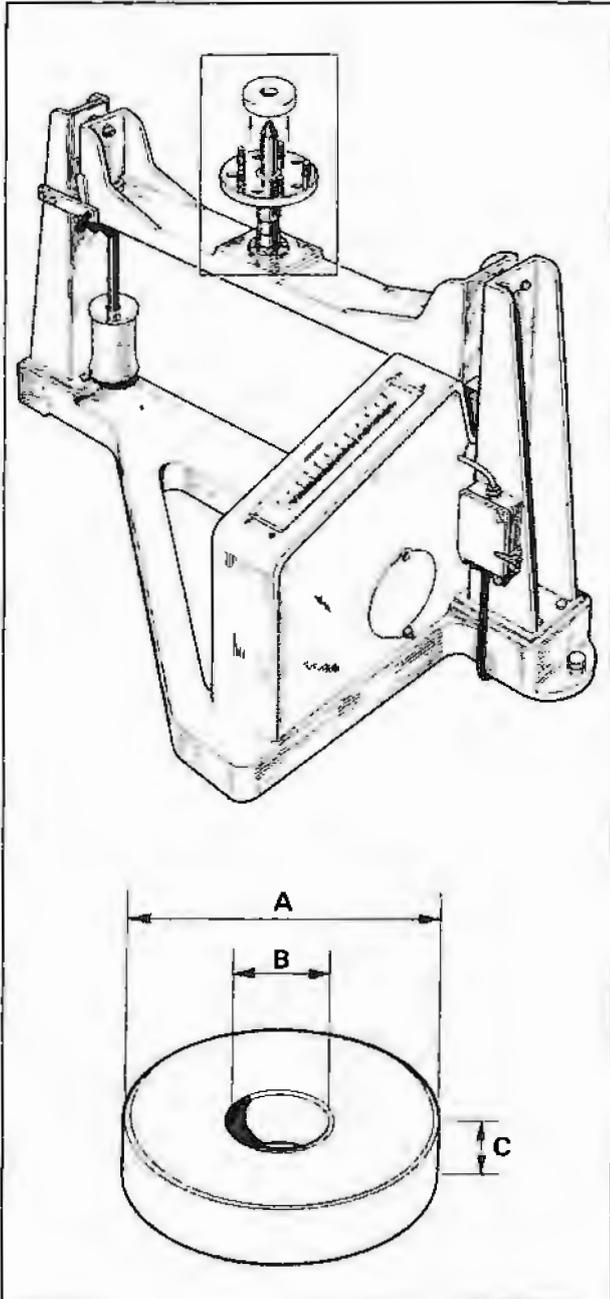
Horizontal type of balancing machine with adapter for spigotted wheels
